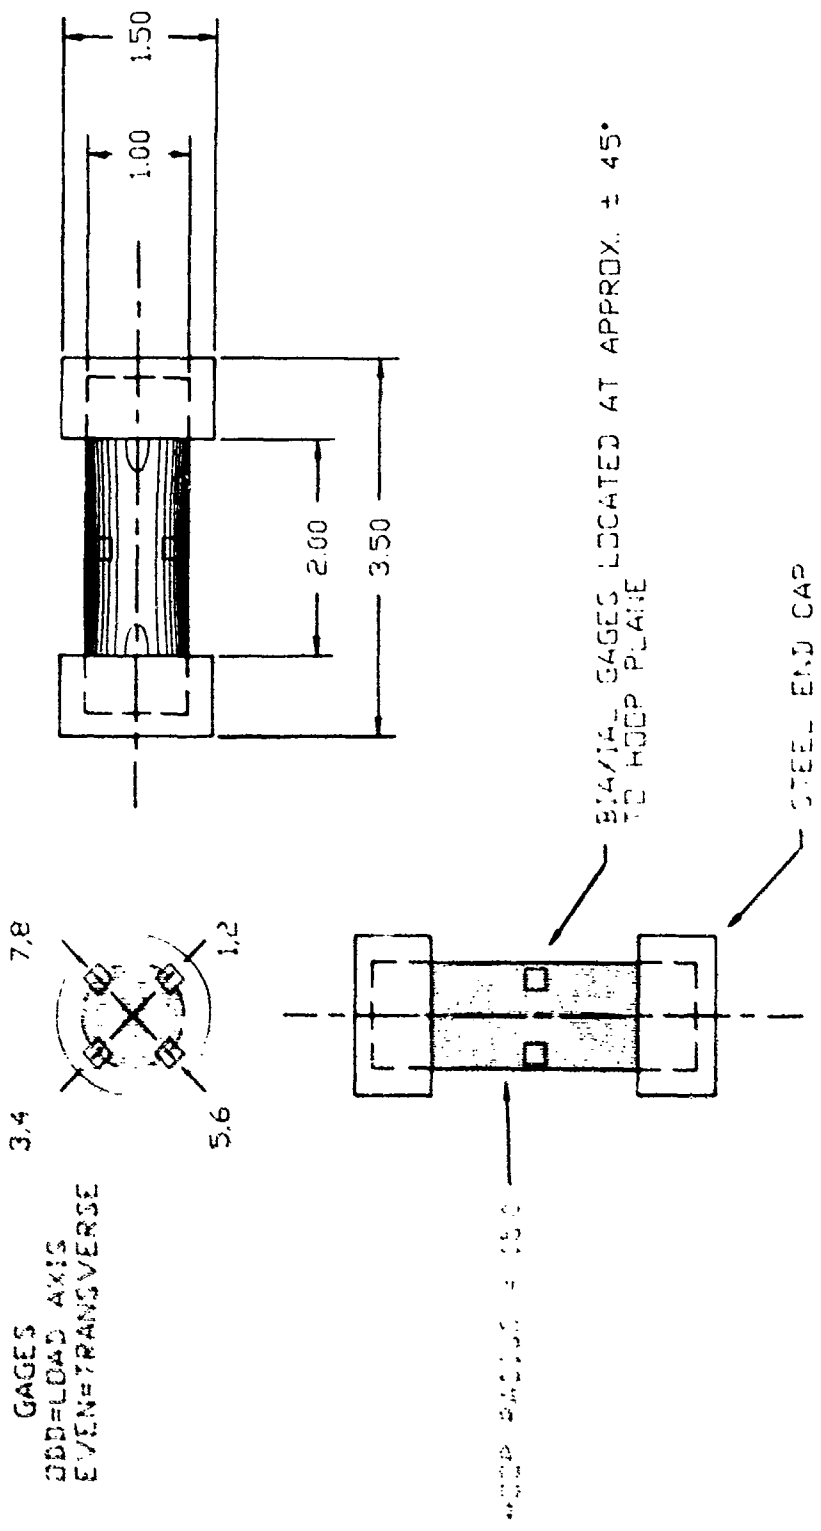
Dimensions of hoop-compression specimen and location of straingages. The dimensions of axial-compression specimen and location of gages is identical.
